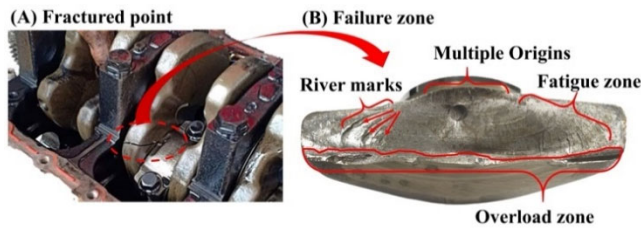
Case study of the broken crankshaft; (A) the fractured point location; (B) cross section area of failure zone
